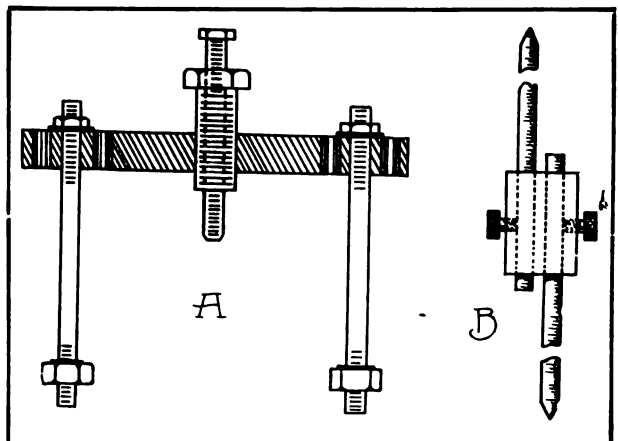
A, a Practical Abstractor Tool; B, Gauge for Aligning Wheels.
